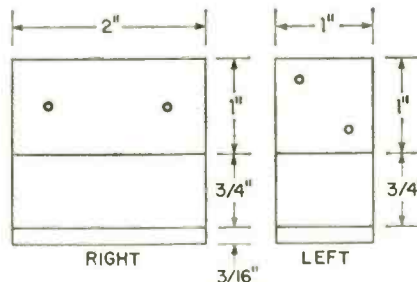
CLAMP BRACKETS for holding camera to front panel of scope.
